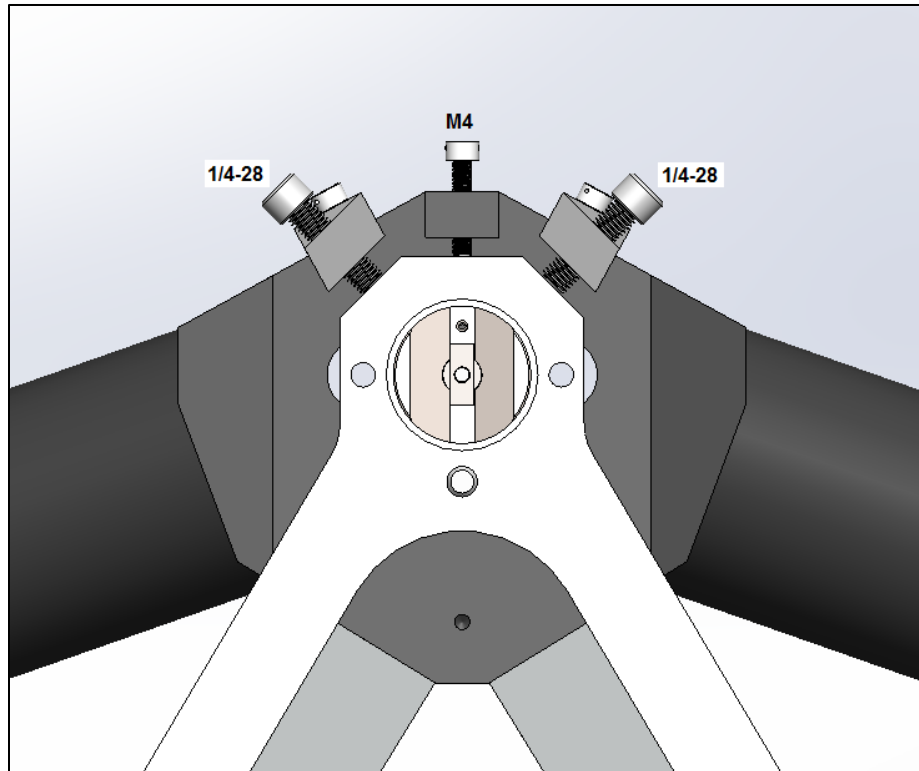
Groove Lock on axis position components. Note that Swing-Arm is M4 and Groove Lock components are 1/4-28. Hardware is drilled head for safety wire after final alignment. [Figure from Reference 1]
